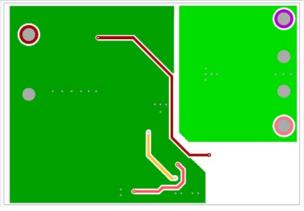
ISL6844EVAL3Z - BOTTOM LAYER (SOLDER SIDE)
